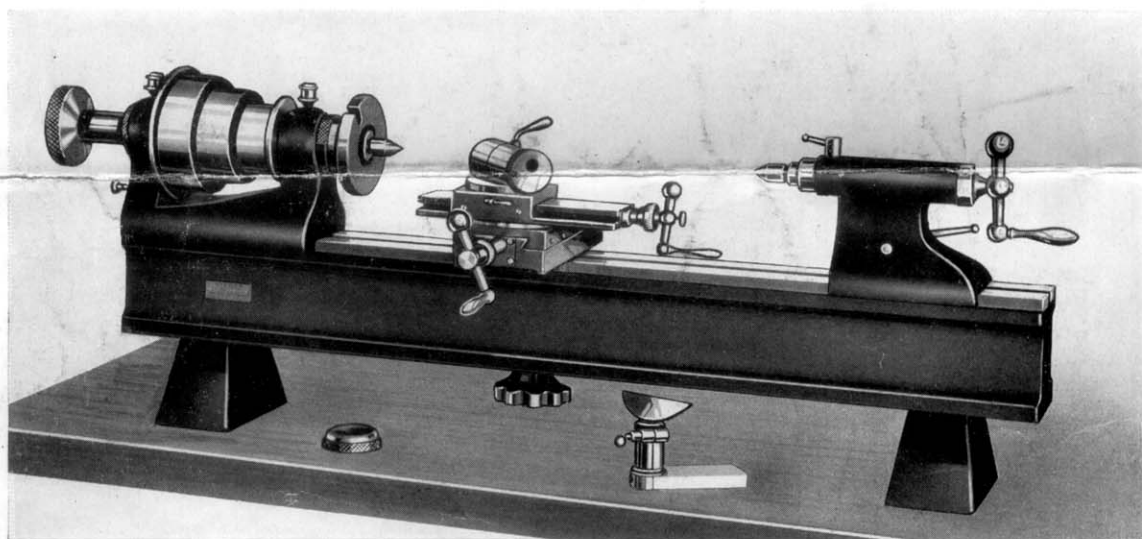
Rivett Plain Precision Bench Lathe, Series 505. Built in five headstock sizes
